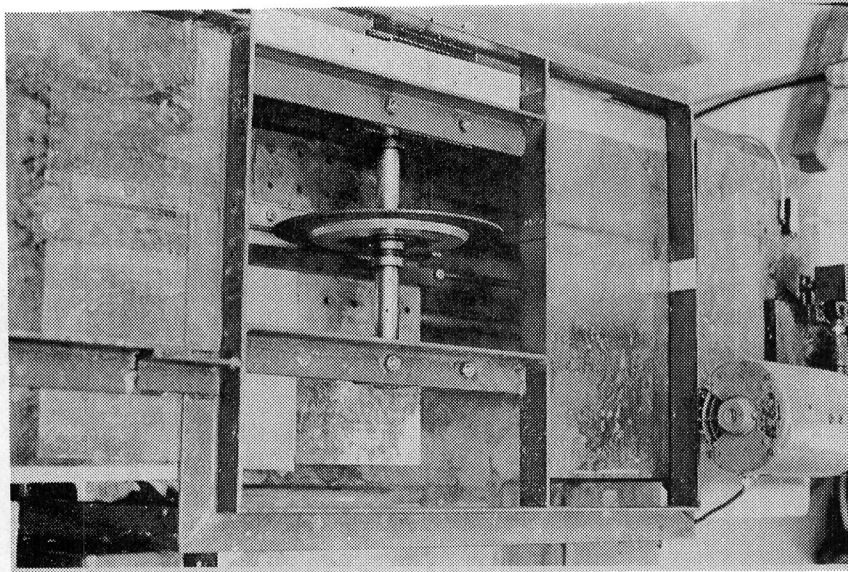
FLAT SPECIMEN ABRASIVE WHEEL CUTTING APPARATUS
